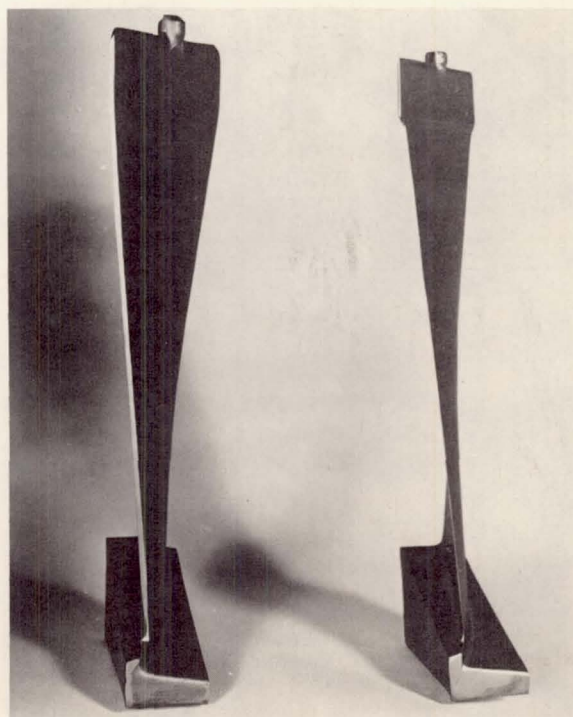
Turbine blades. Electrochemical machining. (Courtesy Steel Improvement & Forge Co.)
